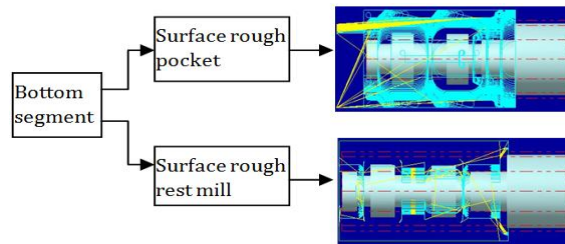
Tool paths for surface rough pocket and surface rough rest mill
